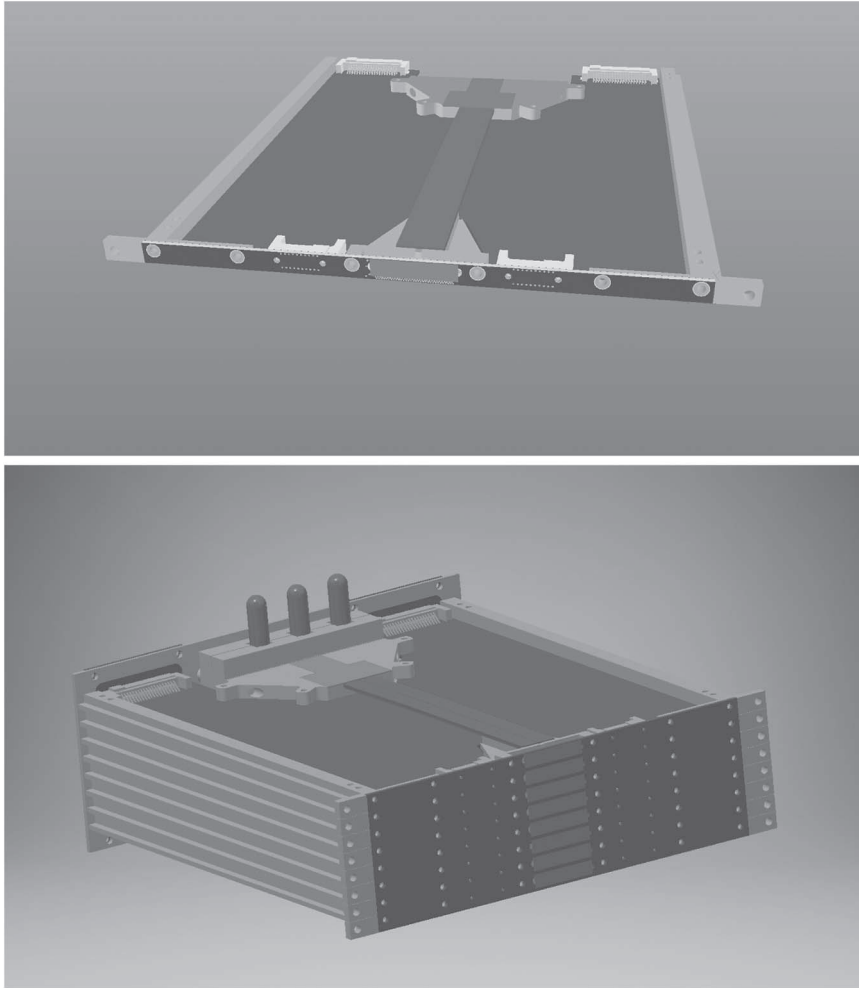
On the top the concept design of the final detector head. On the bottom the stacking of 8 front-end electronics PCBs.
